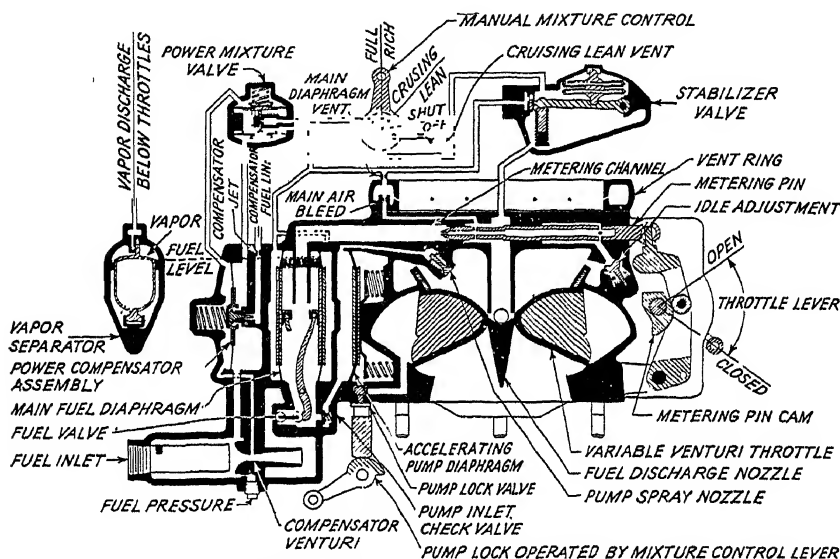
Schematic diagram of a Holley model *H* carburetor. (Holley Carburetor Co.)
